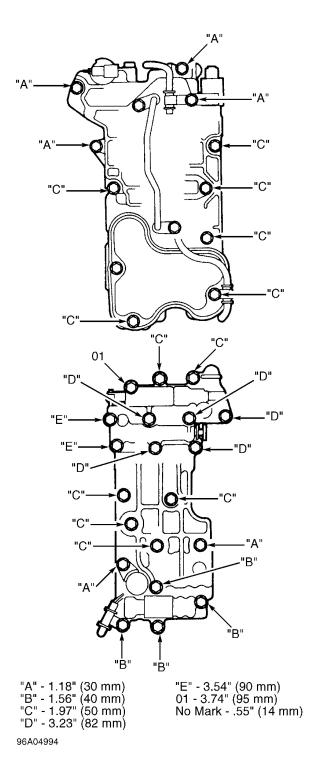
Identifying Valve Body Gaskets (GF4A-EL) Courtesy of MAZDA MOTORS CORP.
